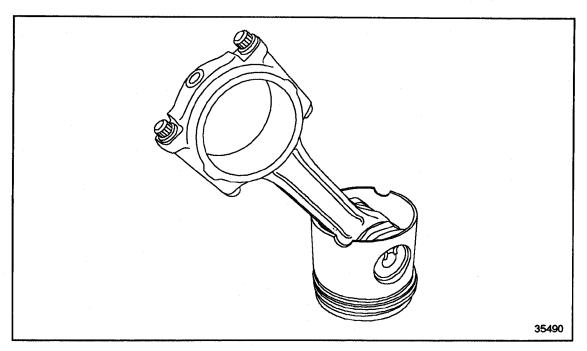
Positioning of the Piston and Connecting Rod Assembly
